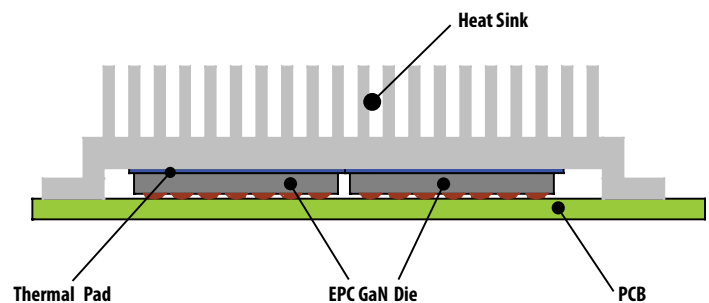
eGaN FETs mounted on a PCB with heatsink directly attached
